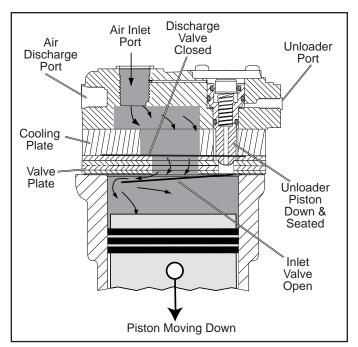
A - OPERATION - LOADED (INTAKE). (SIMILAR FOR ALL COMPRESSORS - STANDARD COMPRESSOR SHOWN)
